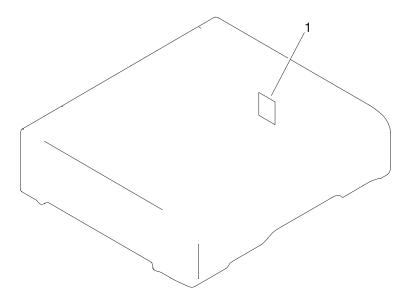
Paper Feeder PCB Assembly Location Diagram (2 of 2) R90 - 1
